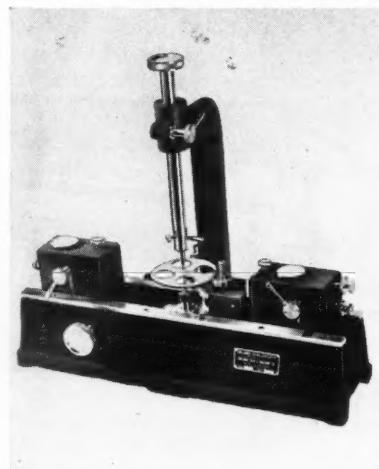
Orlando gear checker equipped with rolling attachment for checking pitch diameter and concentricity
